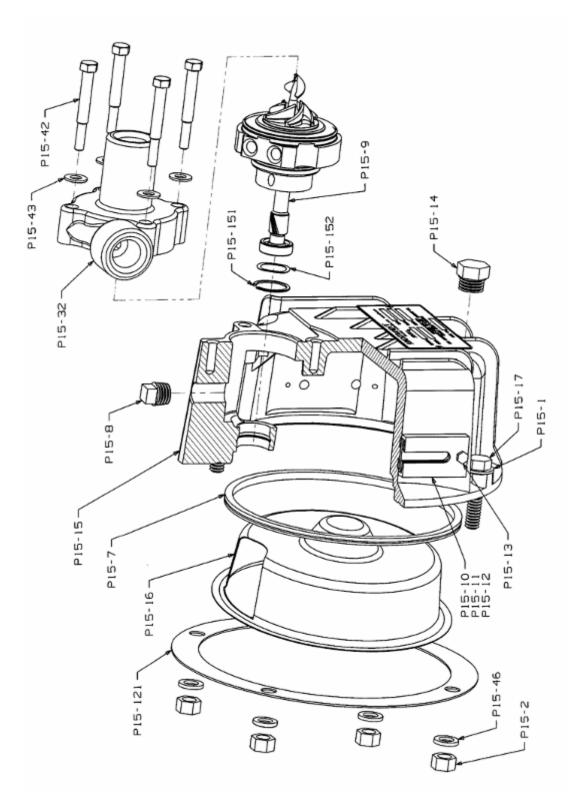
PUMP AND GEARBOX ASSEMBLY
